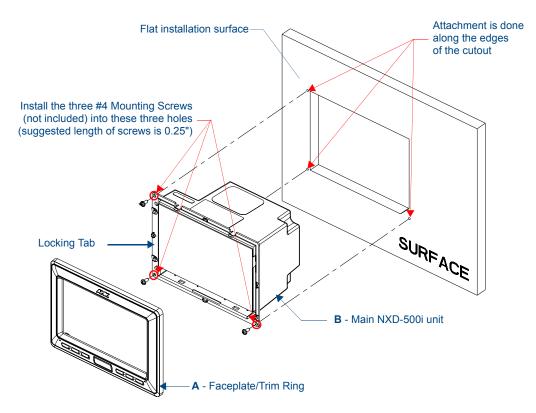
Wall Mount panel installation configuration for flat surfaces
